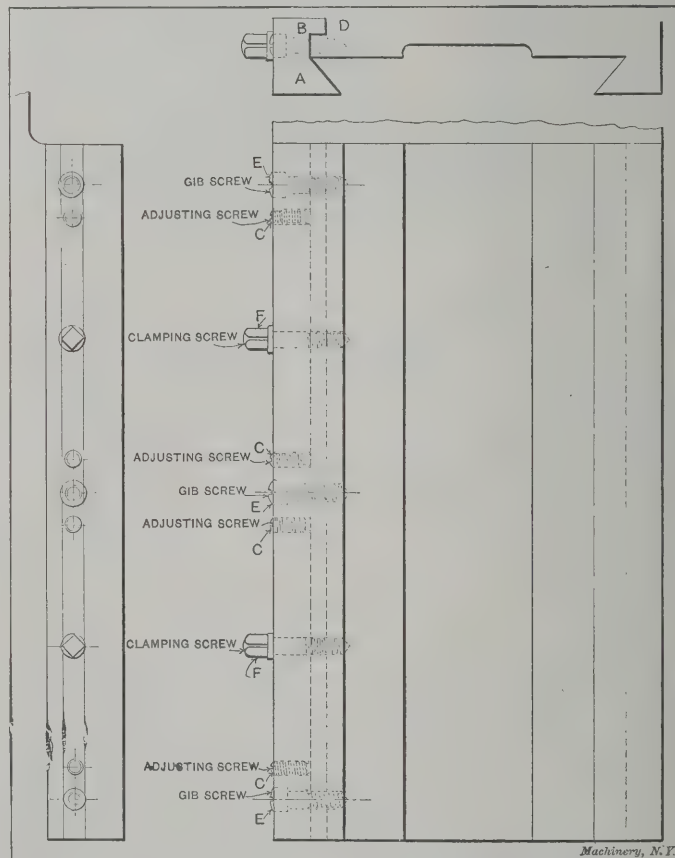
Construction of Gib for Milling Machine Knee Slide
